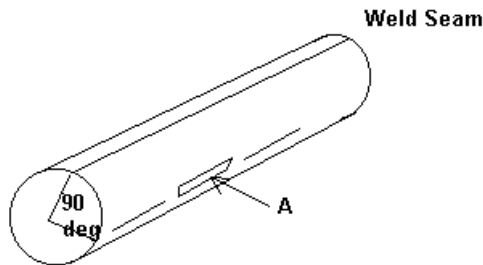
Orientation of Tensile Test Strip Specimen in Pipe
